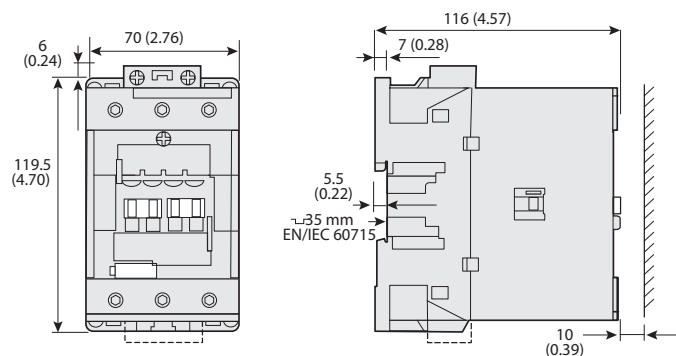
100-E80...100-E96 3-Pole Contactors with Side-mounted Auxiliary Contact
